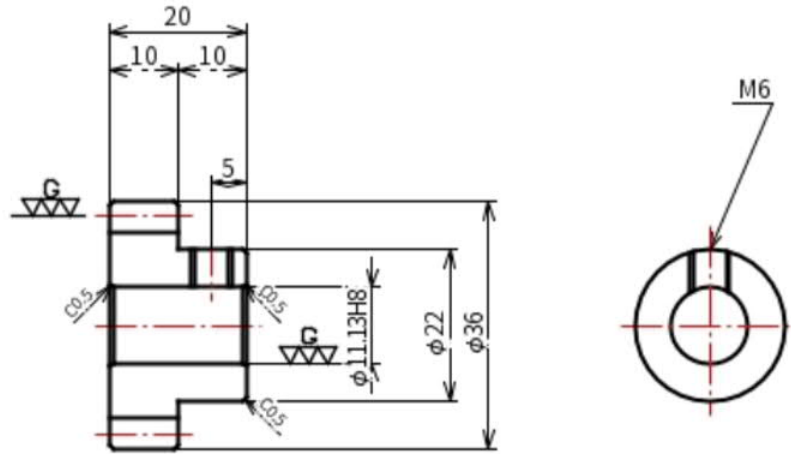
Pinion Drawing (G- Gear grinding, C- Chamfer, M6- 6mm pitch metric thread)
